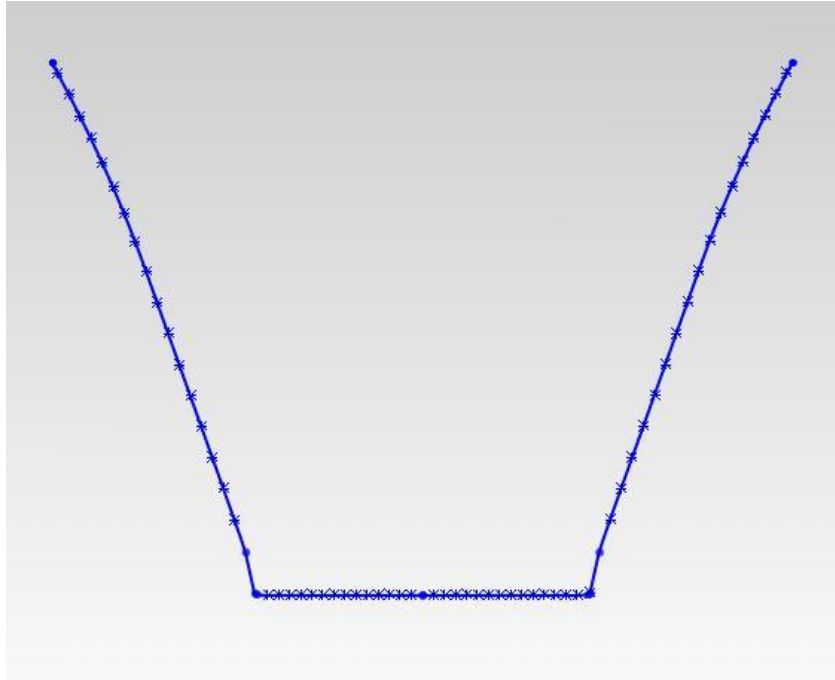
Drawing of gear cutter profile ready to use for manufacturing
